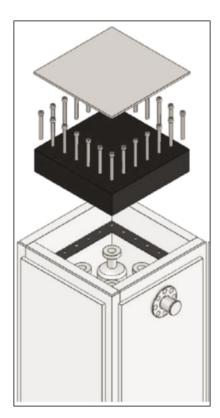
TPBAR Disposal Container Top Exploded View [2].
